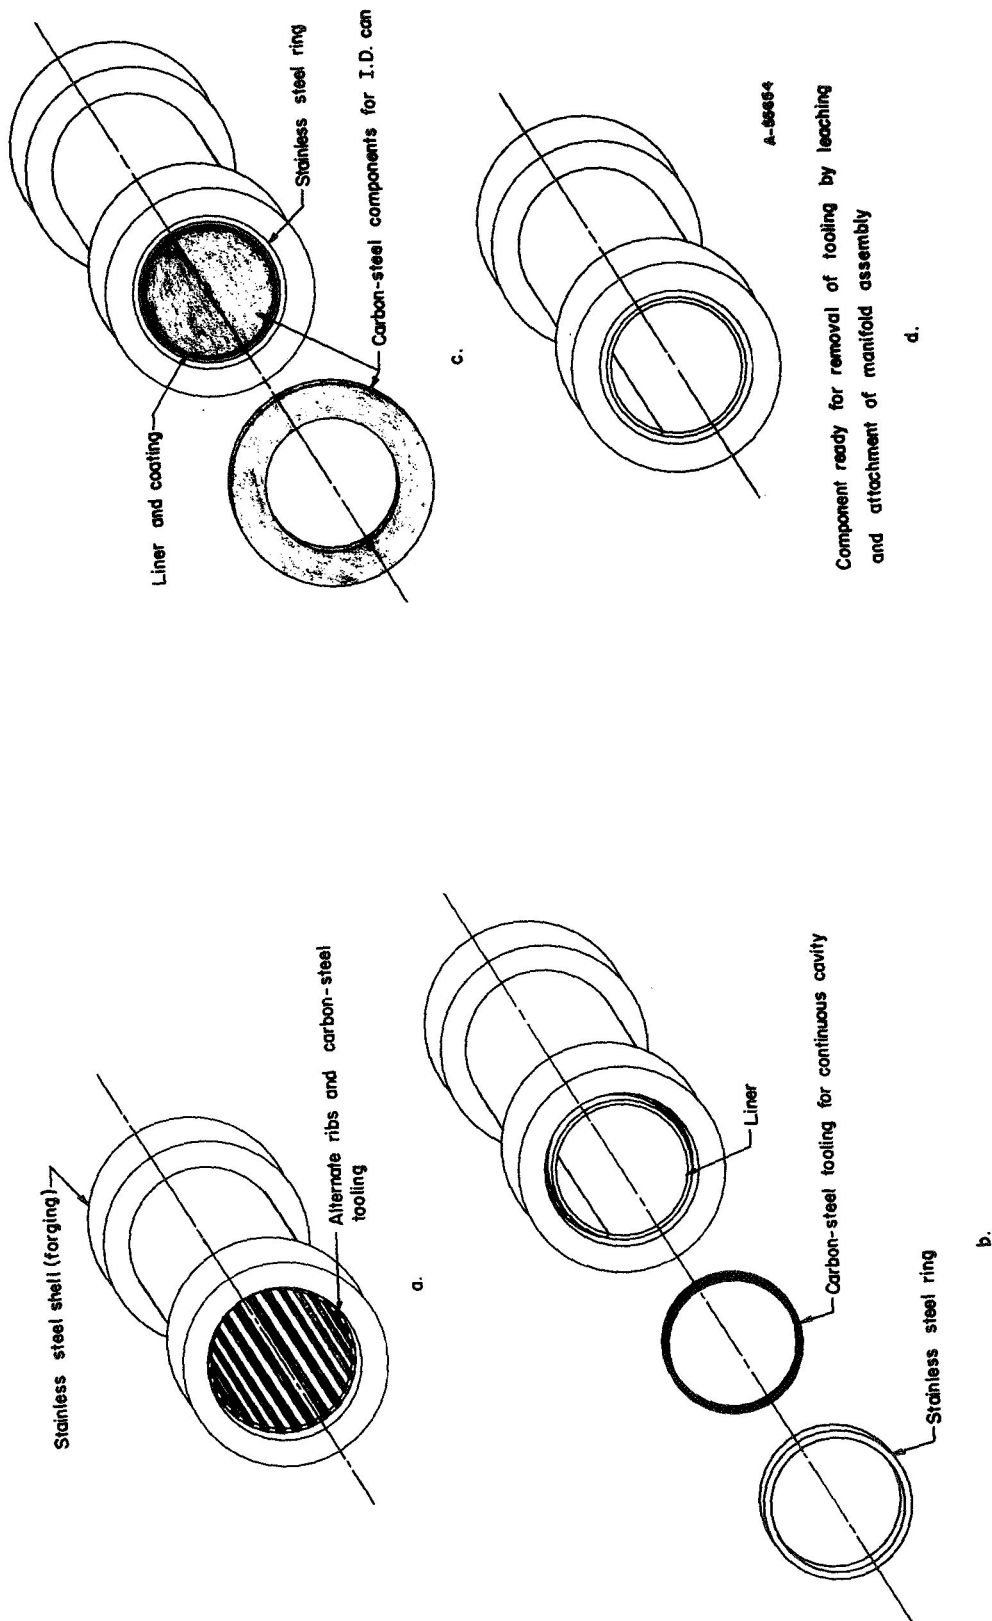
CYLINDRICAL-SPOOL-PIECE ASSEMBLY
